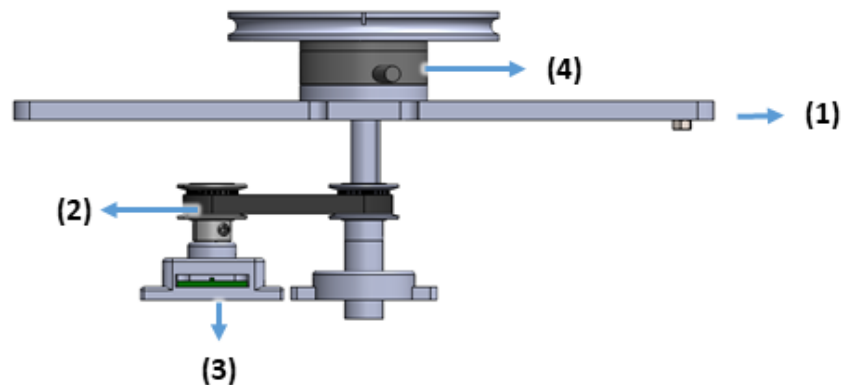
CAD of output in close-up showing in front view with 1:2 scale; (1) output shaft, (2) pulley and belt mechanism, (3) encoder and (4) force/torque sensor
